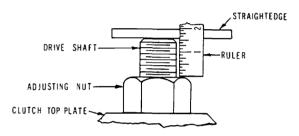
MEASURING PROTRUSION OF DRIVE SHAFT PAST ADJUSTING NUT
